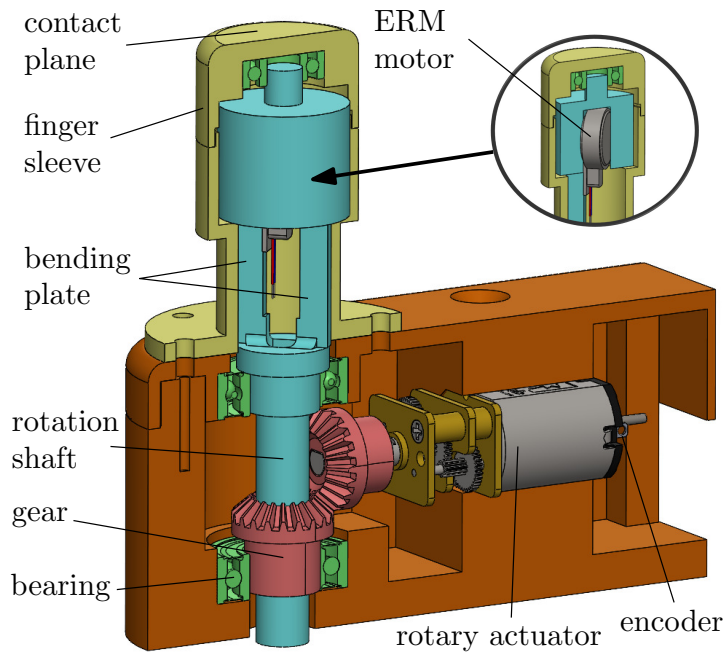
Section view of the Vibratory Finger Manipulator (VFM).
